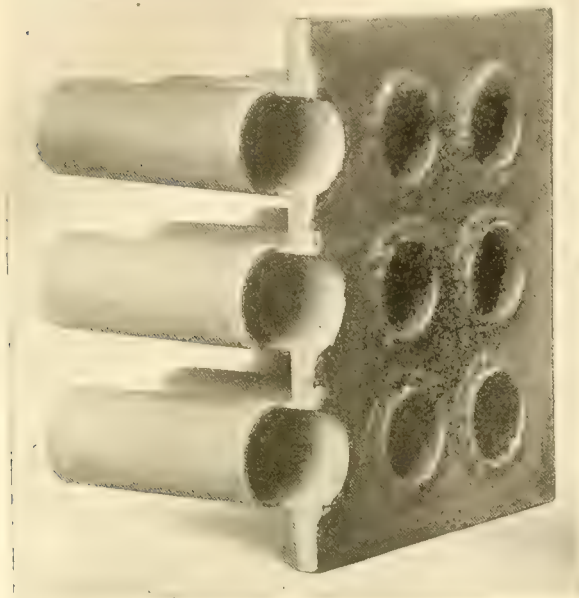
BOILER FLUES WELDED TO FLUE SHEET
